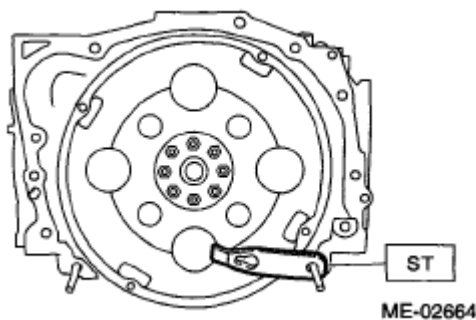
Identifying ST 498497100 Crankshaft Stopper
